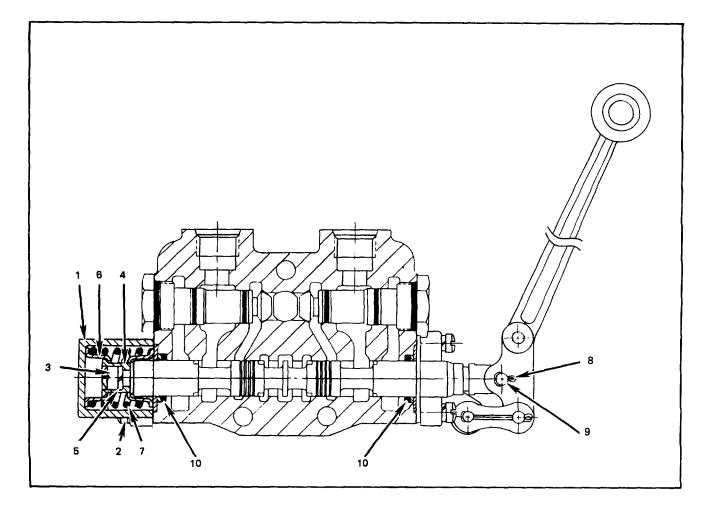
Schematic-View of Typical Control Valve Assembly
